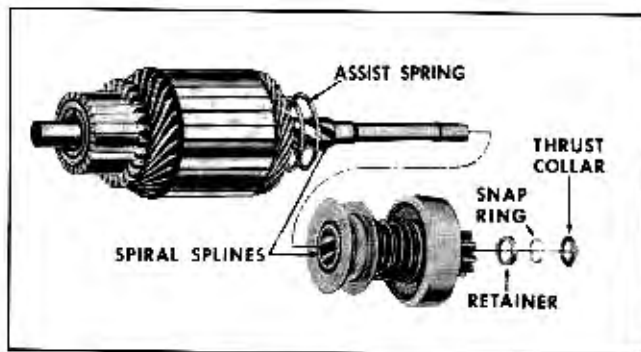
Armature and Overrunning Clutch Assembly—Exploded
